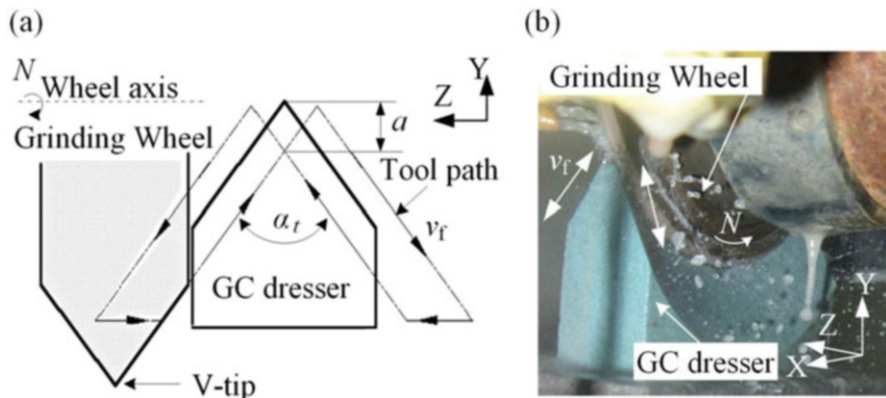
Mechanical truing of diamond wheel micro-tip: (a) tool paths on YZ-section and (b) actual truing scene
